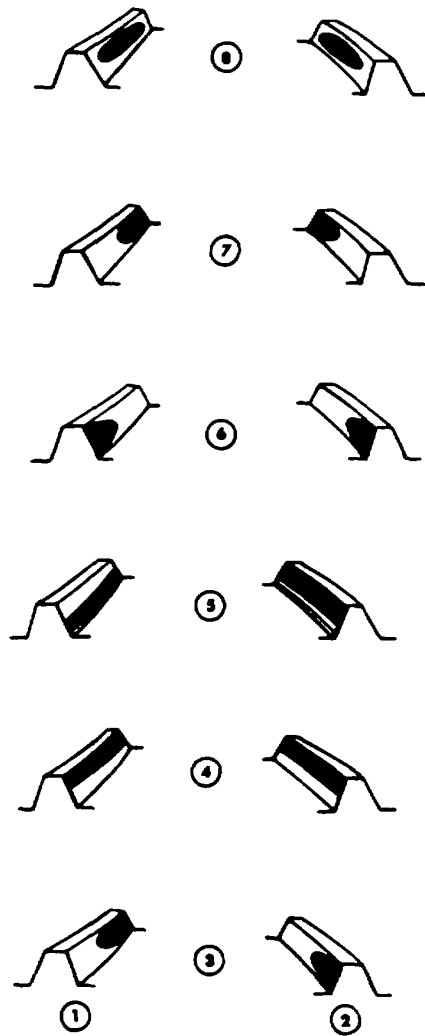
Painting Gear Teeth for Obtaining Tooth Contact Impressions
